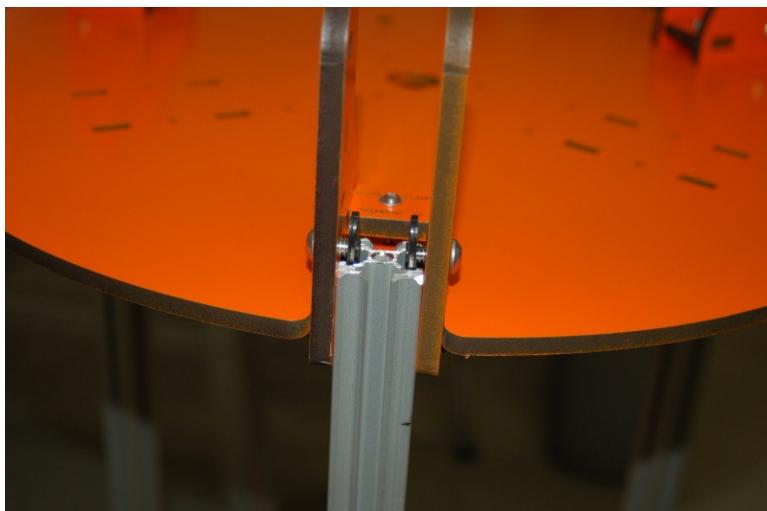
Setting the top pairs of T-Nuts into the tower extrusion.
